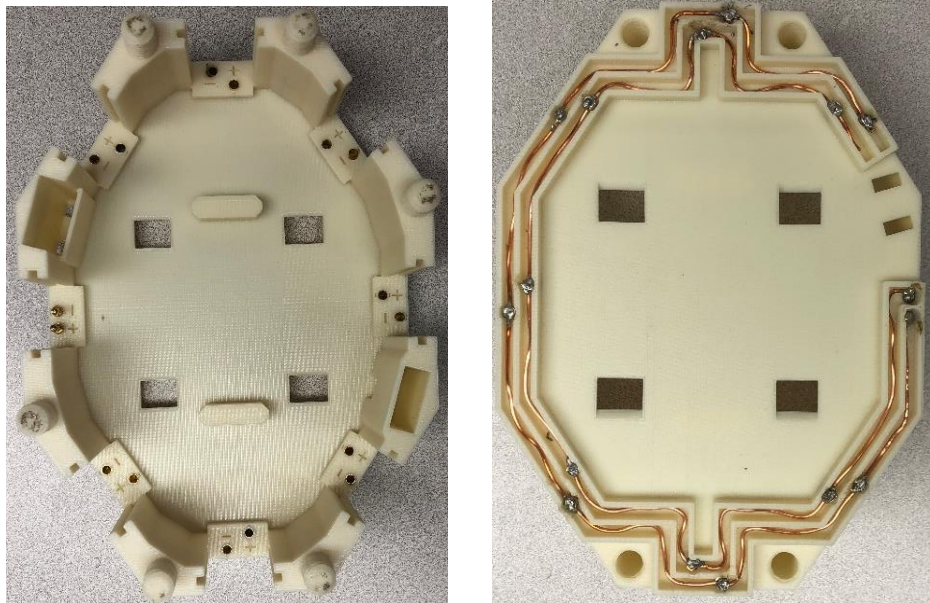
, integration of the developed PDB into the drone body design, (a) top view of the drone body showing the battery input node (far left) and the seven outlets (four for the quadcopter motors and three optional outlets as needed), and (b) bottom view of the drone body with the electric wires routed and soldered to the different outlets (a lid will cover the wires in the fully assembled drone)
